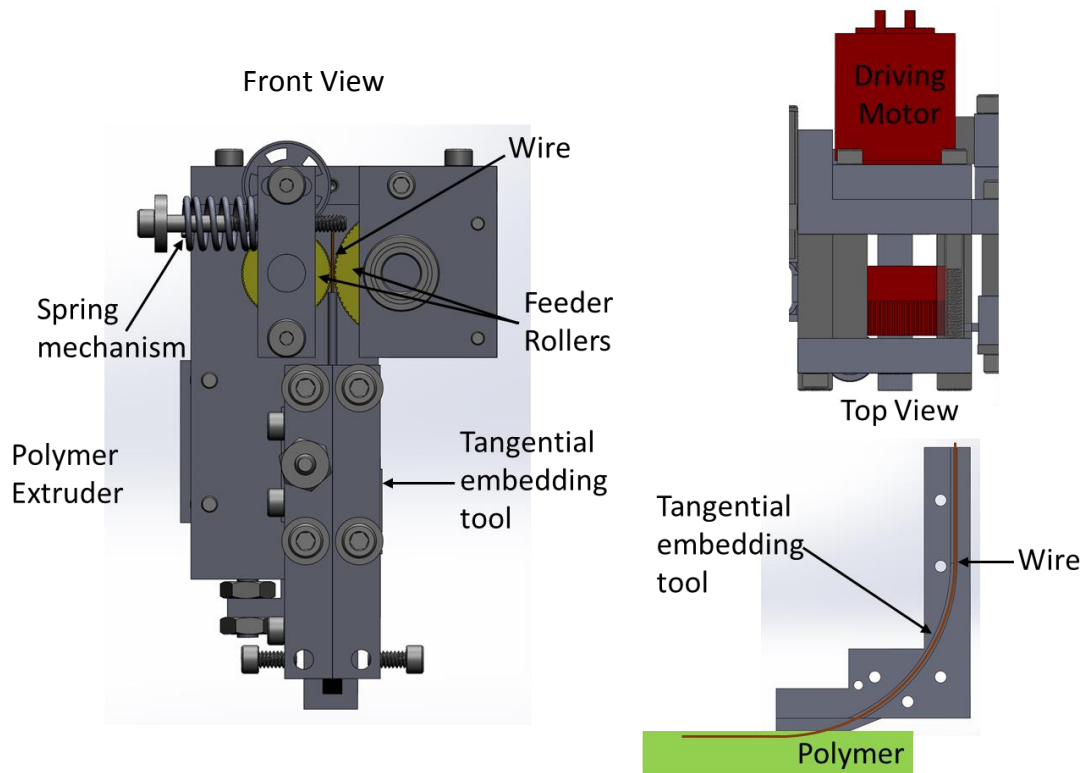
Wire embedding mechanism. The front view shows the feeding mechanism that forces the wire through the hypodermic tube to be directed to the tangential embedding path.
